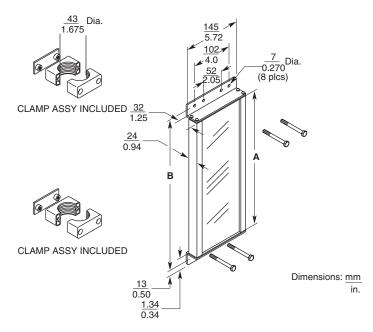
Mirror Dimensions (See Table 42 for Dimensions A and B)
